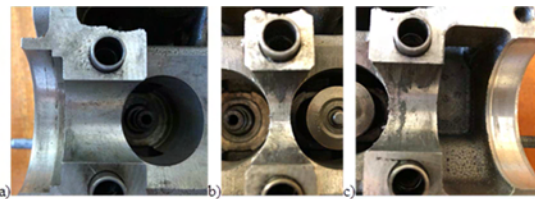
Appearance of worn bearing bushings of camshaft slide bearings on the cylinder head side, a) bearing 3, b) bearing 2, c) bearing 1
